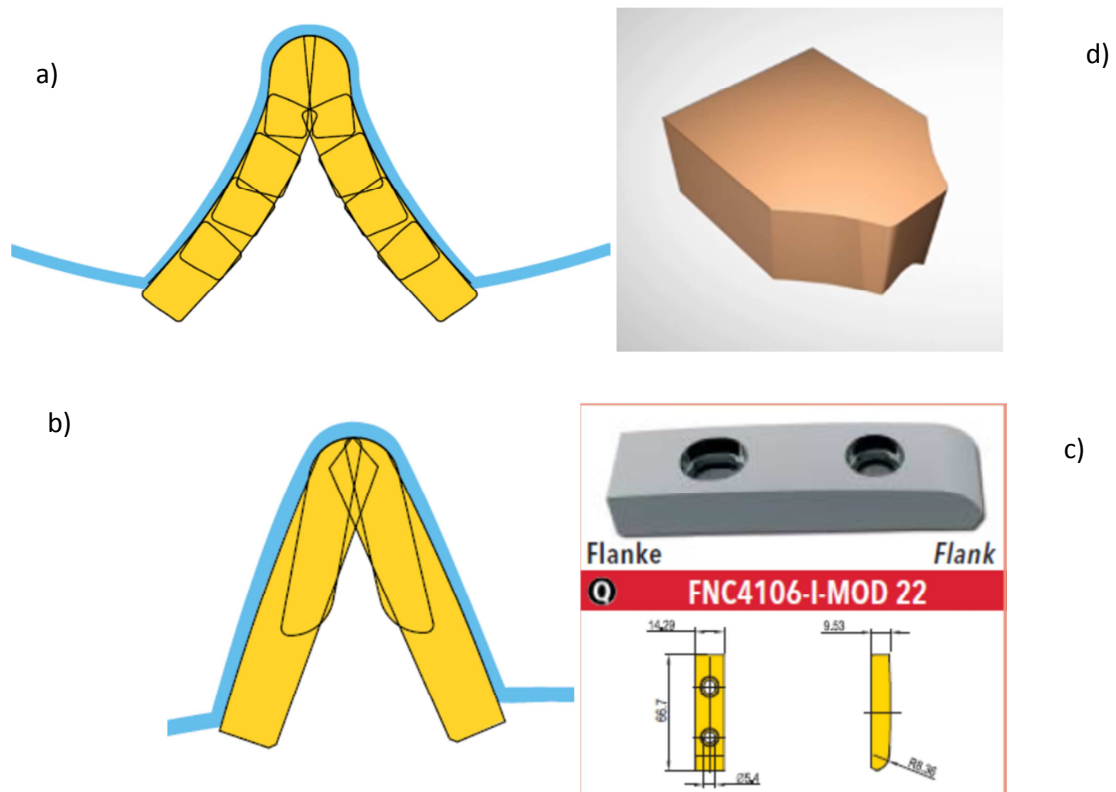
Examples of flank profile a) for external gear, b) for internal gear, c) flank insert [12]
